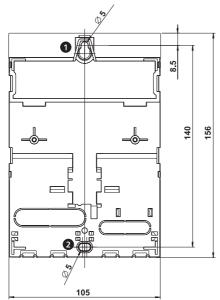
Rear side of the controller with the upper 1 and lower 2 mounting holes
